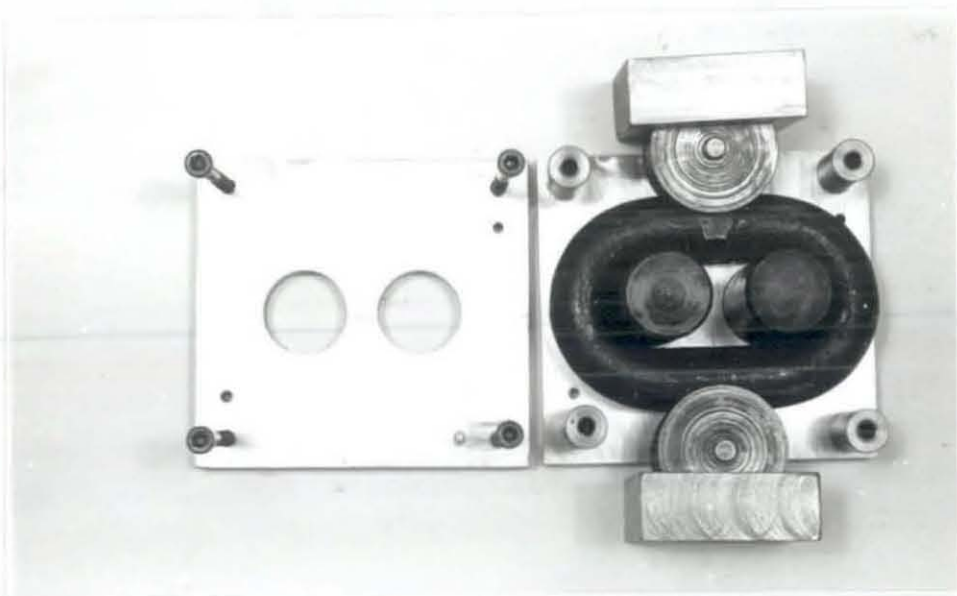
Rollers, pins and packing plates to form the eight shape 19 mm mining cahin.
